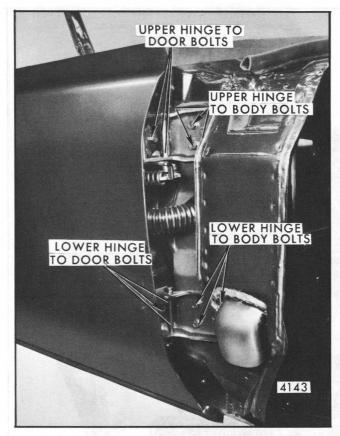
Typical Front Door Hinge Attachment - All Except "X and H" Styles
